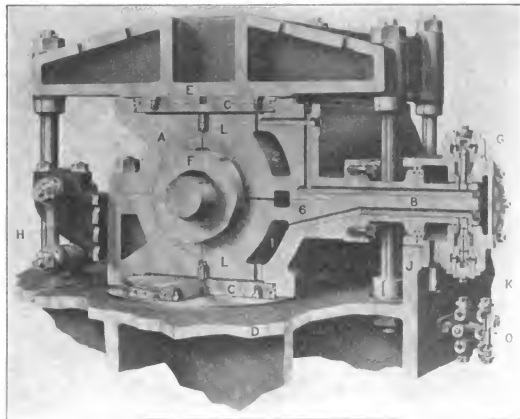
DETAILED SECTIONAL VIEW OF THE WESTINGHOUSE REDUCTION GEAR.
